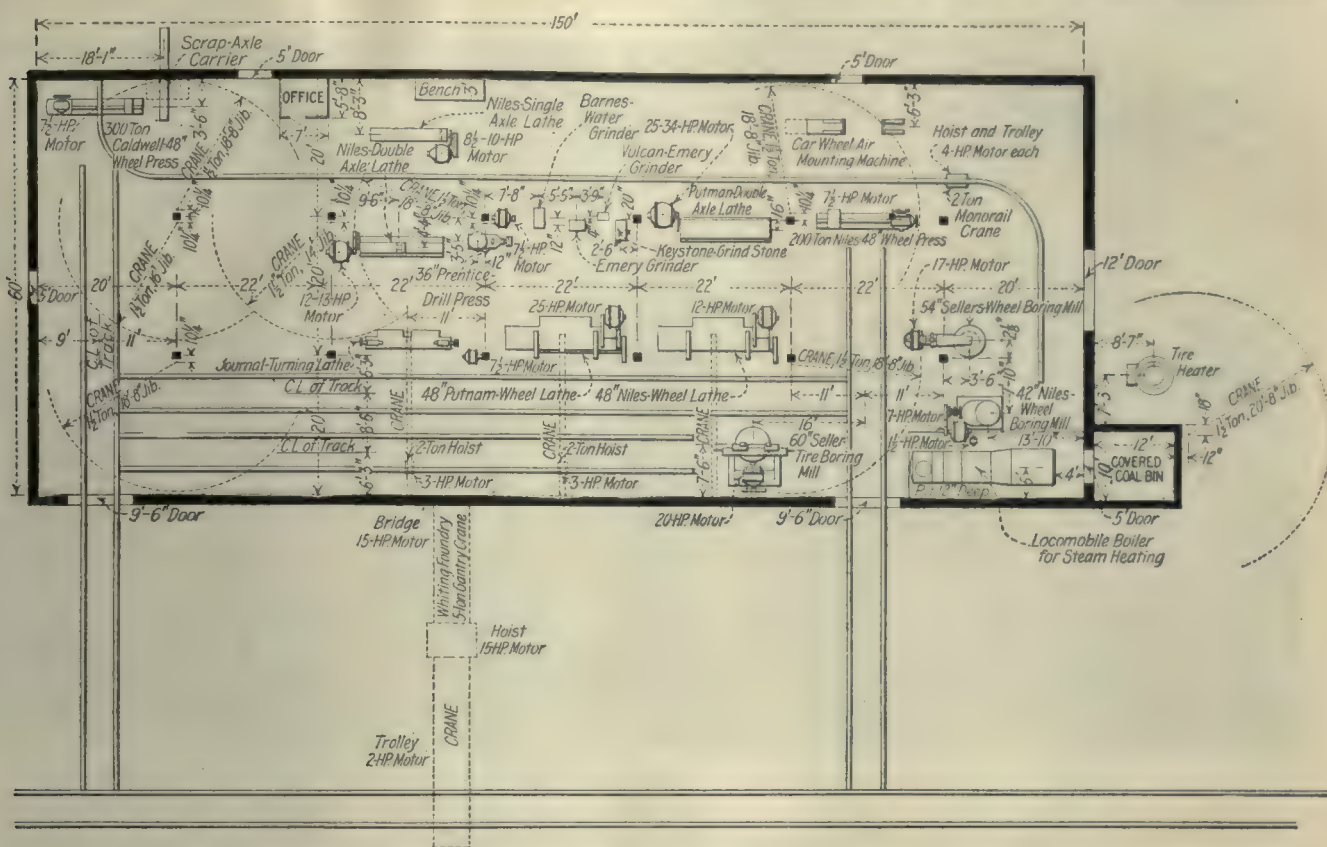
PLAN OF WHEEL SHOP, SHOWING MACHINES, MOTORS AND CRANES
